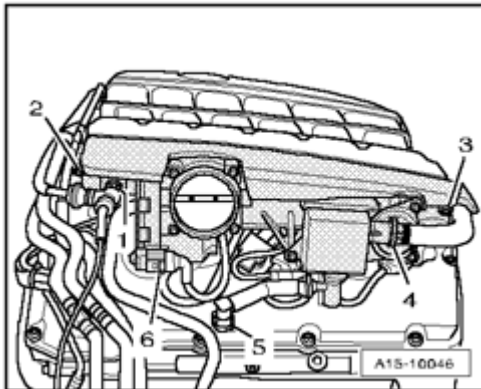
Vacuum Hose, Bolts, Crankcase Breather Hoses & Throttle Valve Control Module J338 Electrical Connection
